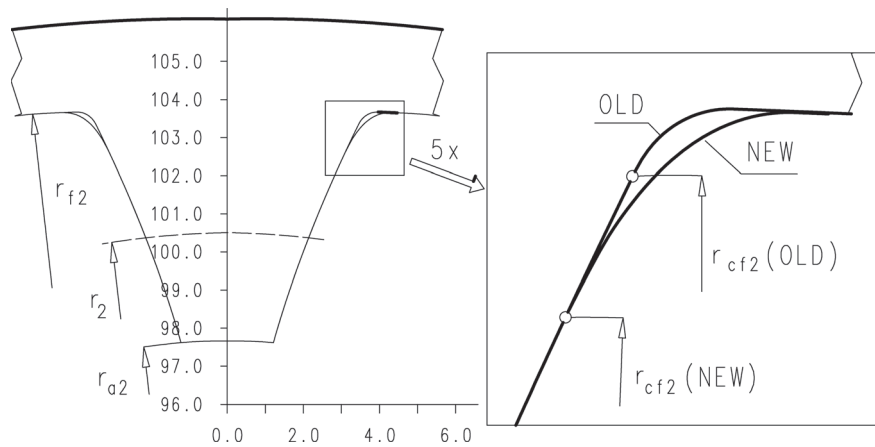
Influence of the tool regrinding rate of a gear-type tool (parameter u) on the tooth-root form of internal gear
